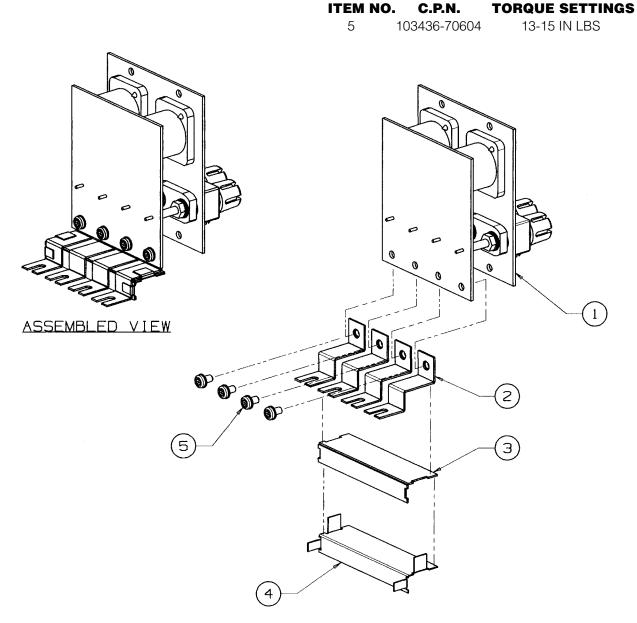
CE4000 Standard Domestic Output Assembly (Exploded View)
